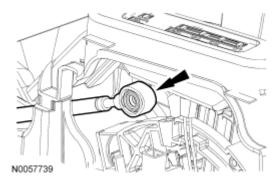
Locating LH VCT Housing Courtesy of FORD MOTOR CO.
